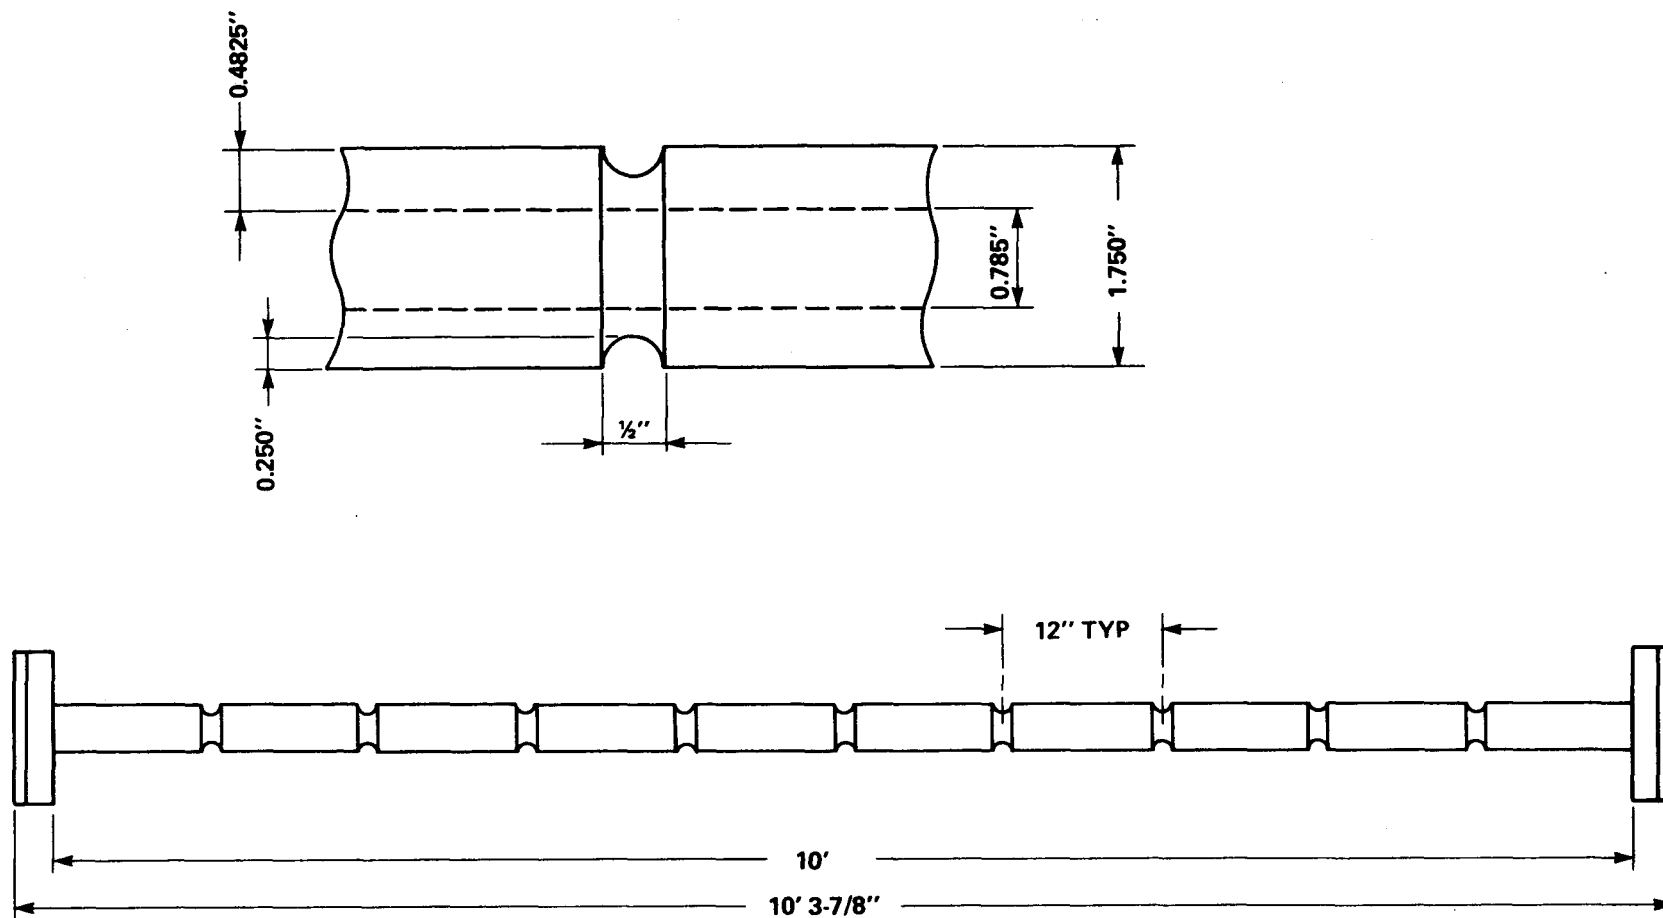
A SCHEMATIC DRAWING OF THE HORIZONTAL TEST SECTION.
